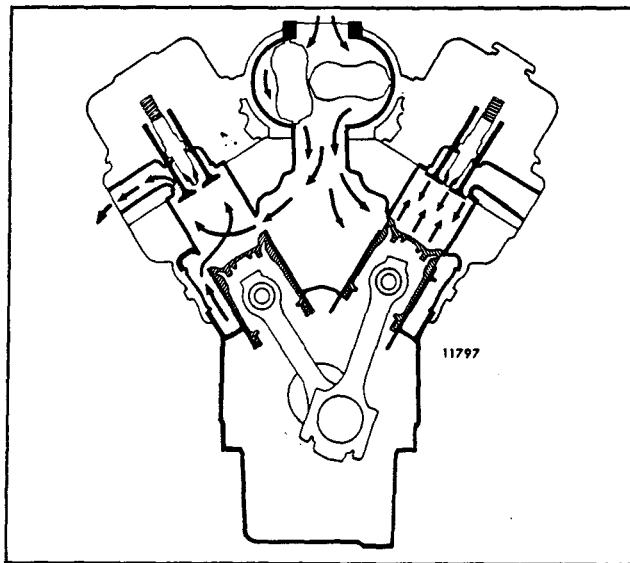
Air Intake System Through Blower and Engine (6V-53 Engine)
